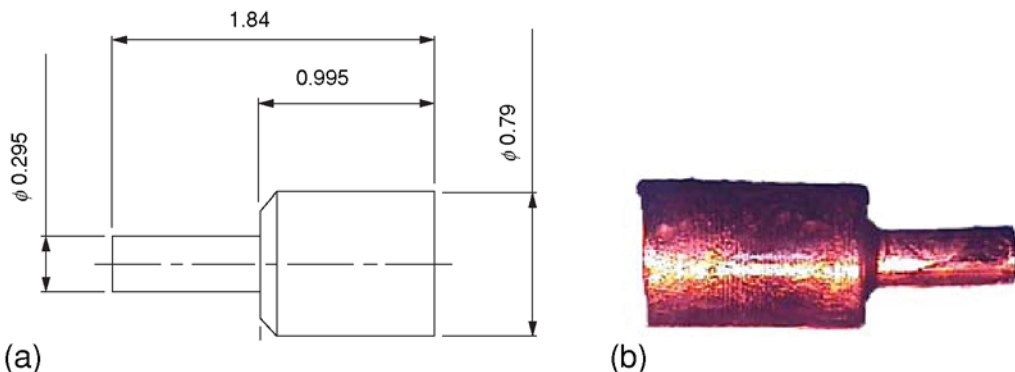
A sample of the extruded micro-pin (dimensions: mm).
